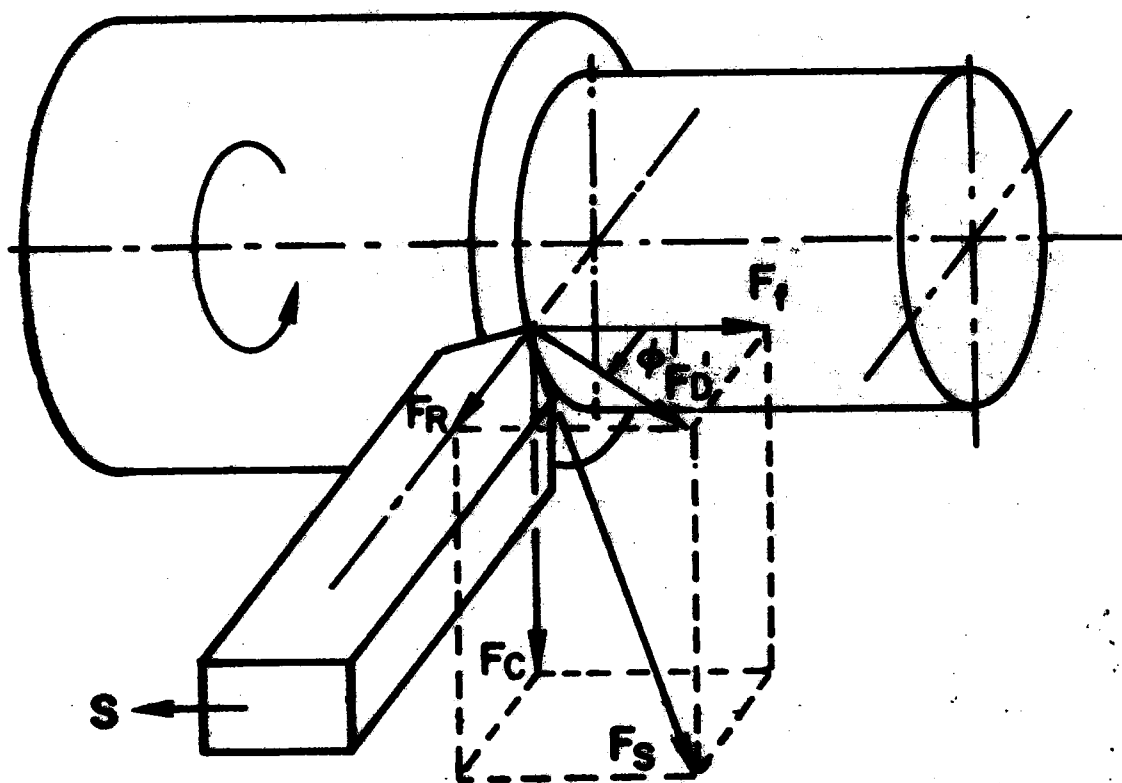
Geometry and cutting forces for a lathe tool. F_c is the cutting force, F_f is the feed force, and F_r is the radial force.
